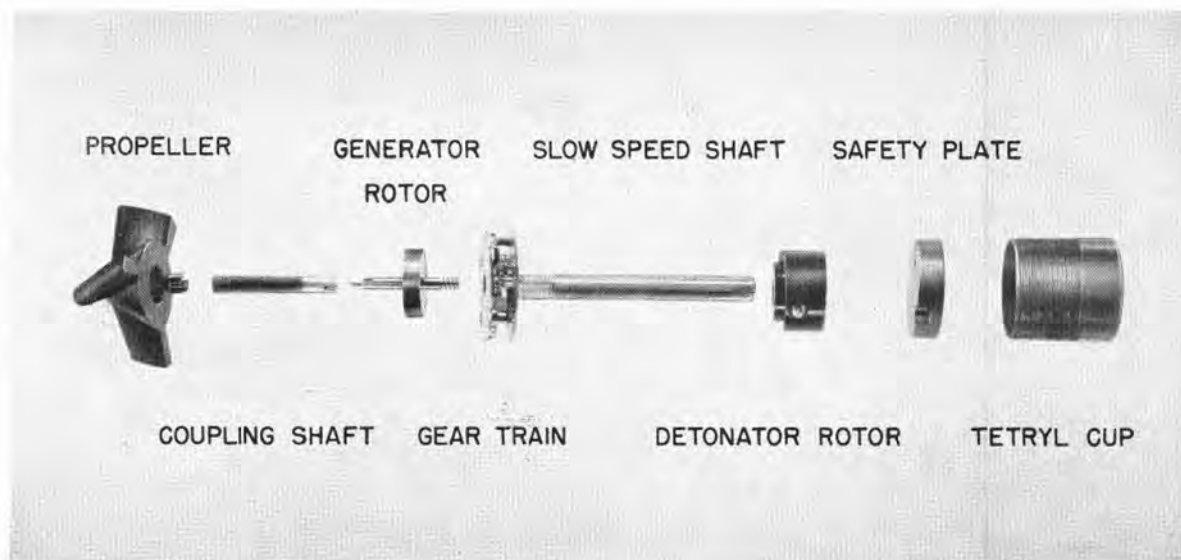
Arming mechanism of T-50 type fuzes with worm gear.
